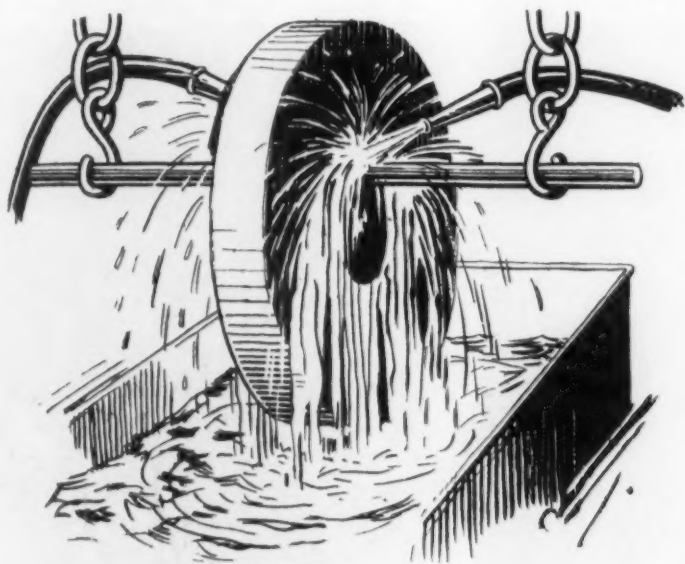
Drawing Illustrating the Method of Spray Quenching a Disk.
